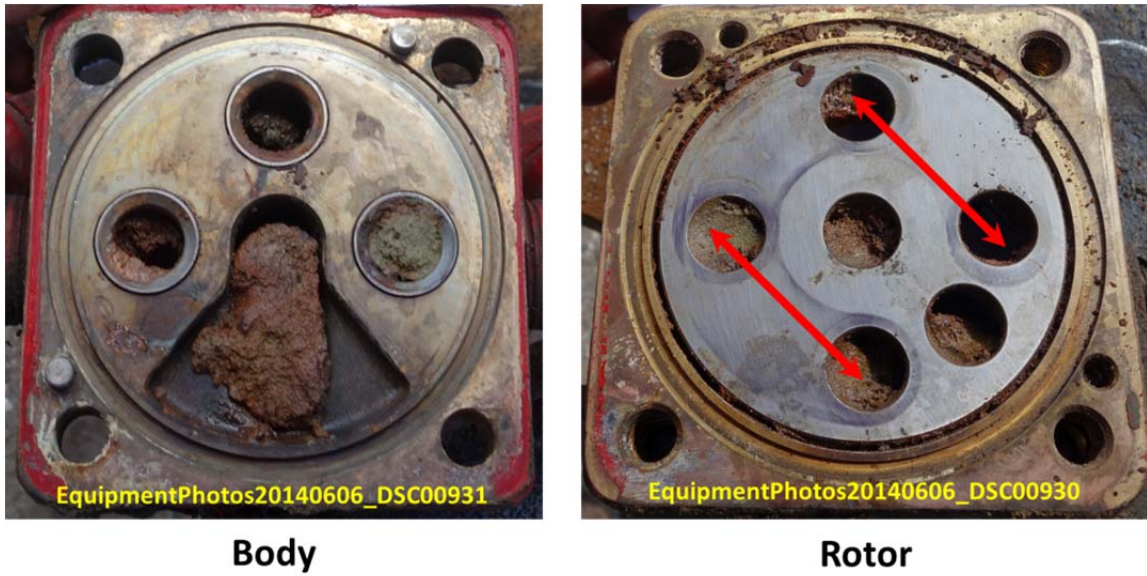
Photographs of Kill Line Selector Valve Body and Rotor
